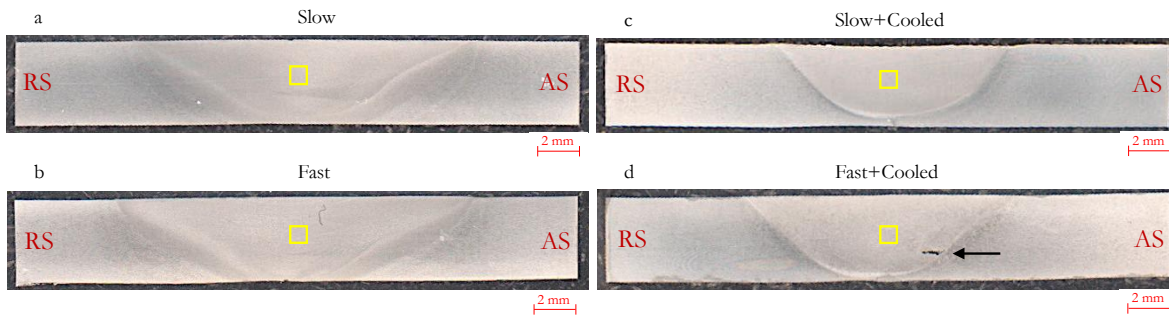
Macrographs of the cross-section of each of the four different weld conditions (yellow square marks position of micrographs and EBSD): a) Slow weld; b) Fast weld ; c) Slow+Cooled weld; d) Fast+Cooled weld, where the arrow points to a void defect.
